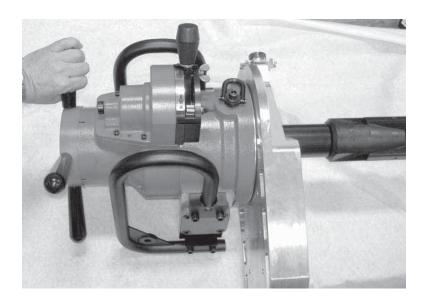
Turn the feed handle counter-clockwise until the mandrel is threaded out of the feed nut.
